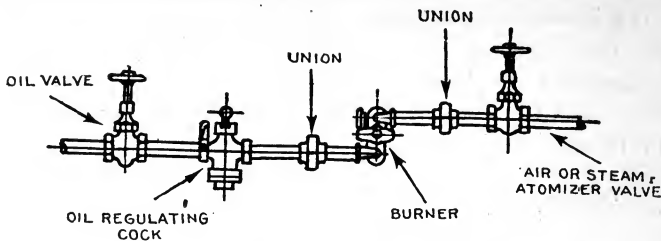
Correct method of connecting *Best* atomizer valve (air or steam), also regulating cock and oil cut out valve.
